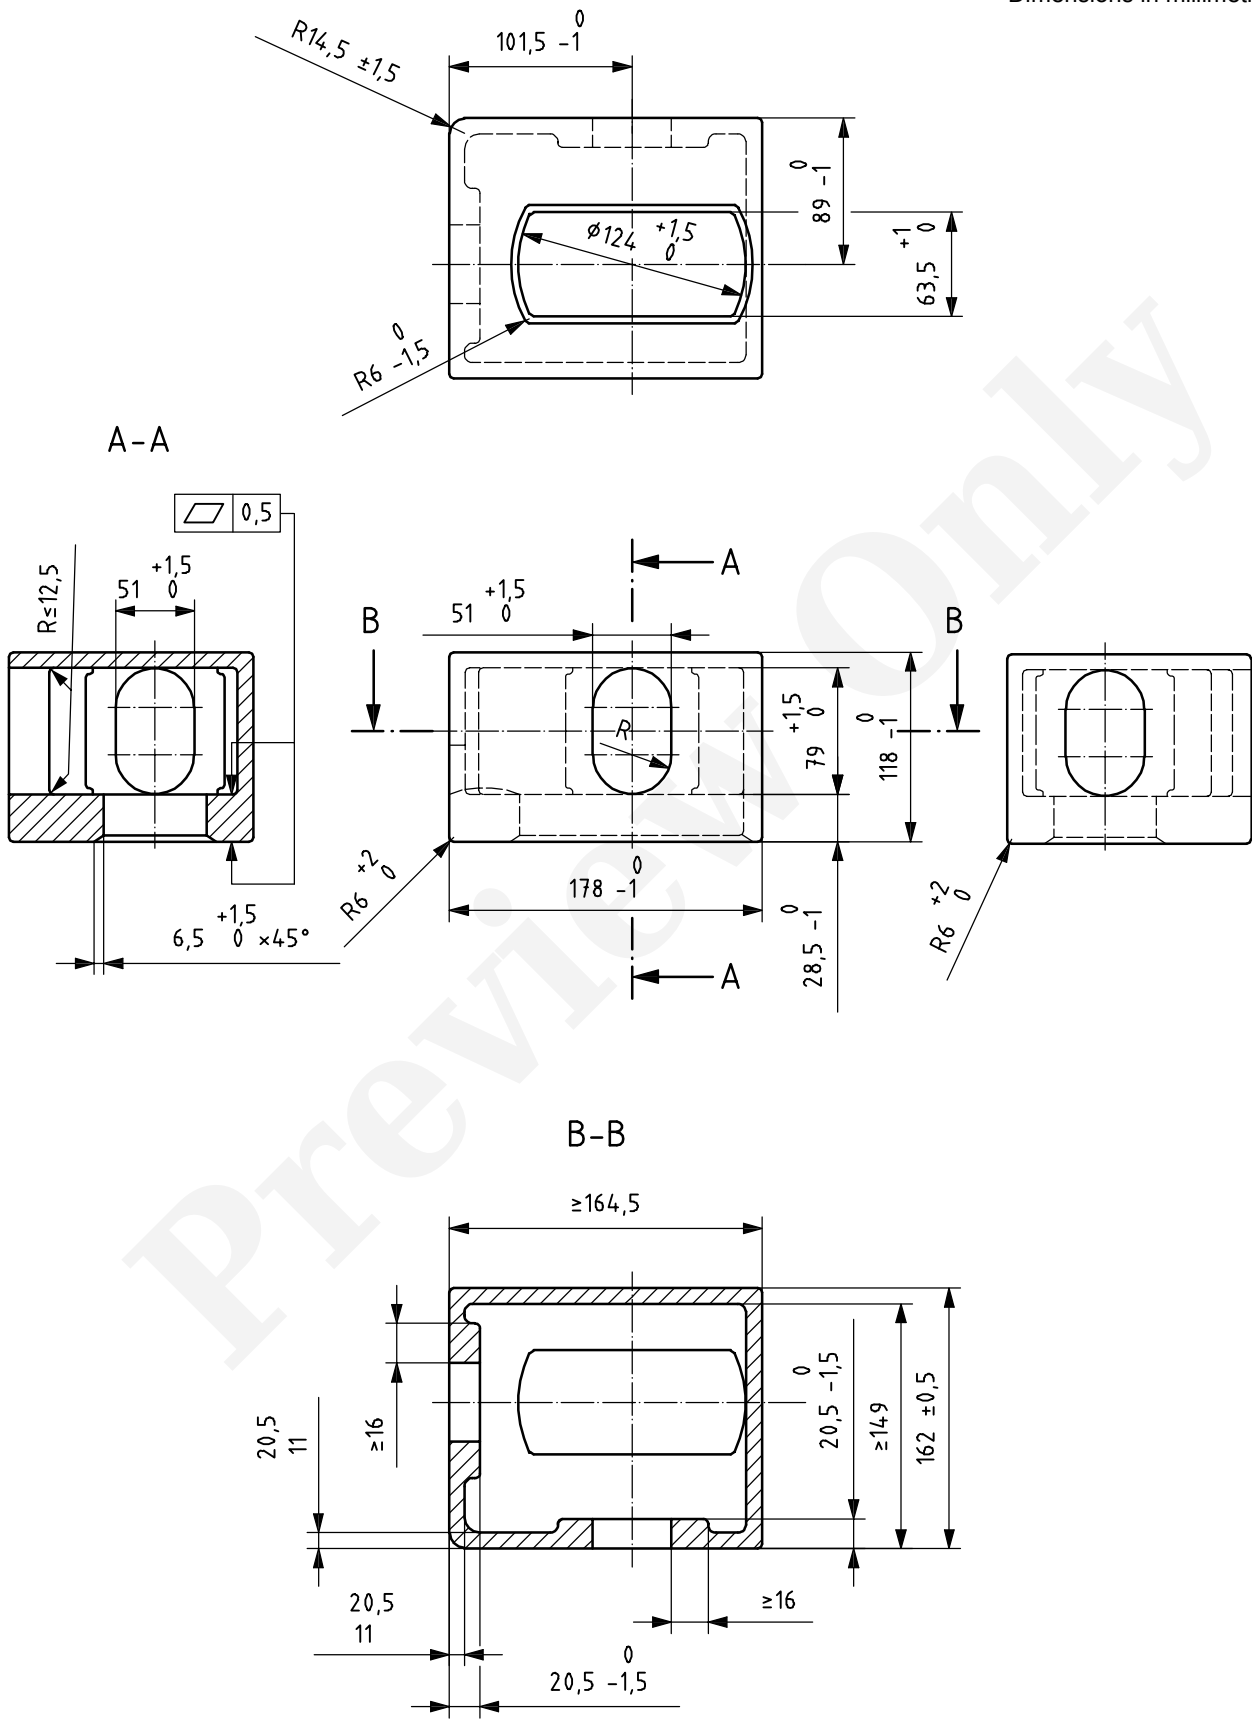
Bottom intermediate fitting — Dimensions in millimetres
